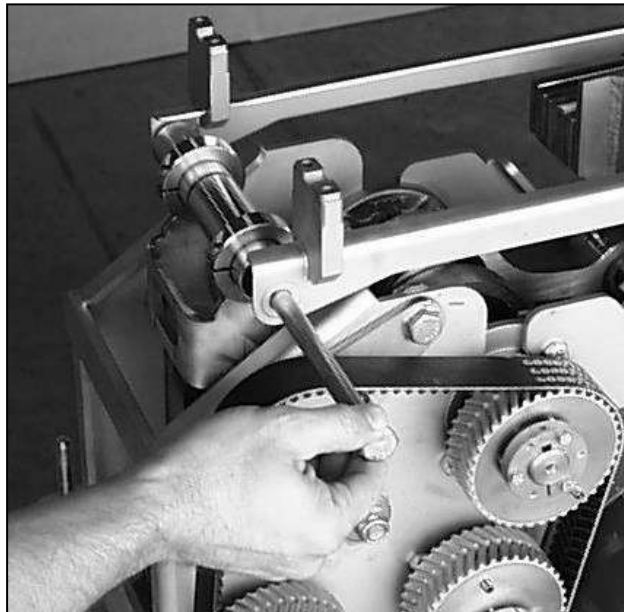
Removing the Pan Attachment Arm Bolt
